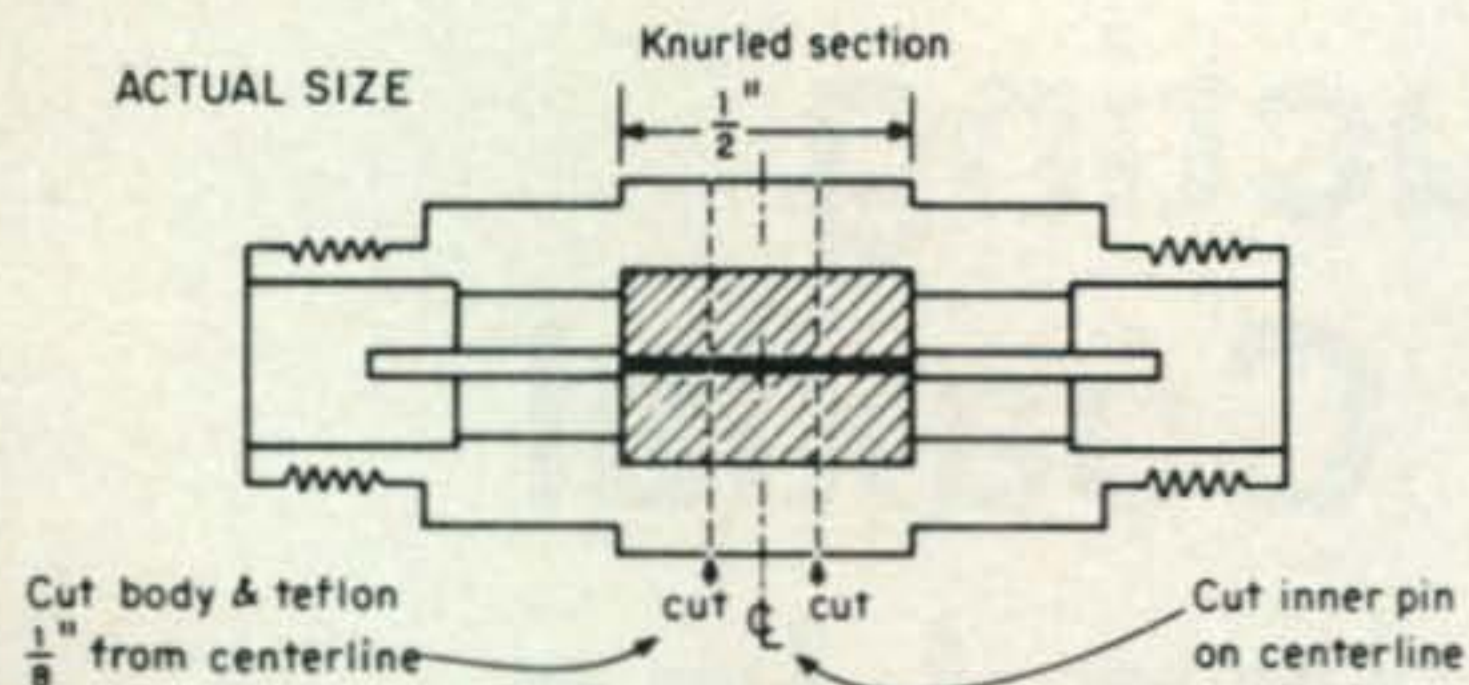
Cross-section of a UG-29B/U Type N connector showing the cuts necessary to make two end fittings for rigid coax.
